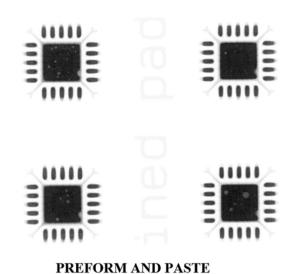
X-ray images of the QFN components assemblies built with different solder material configurations.
